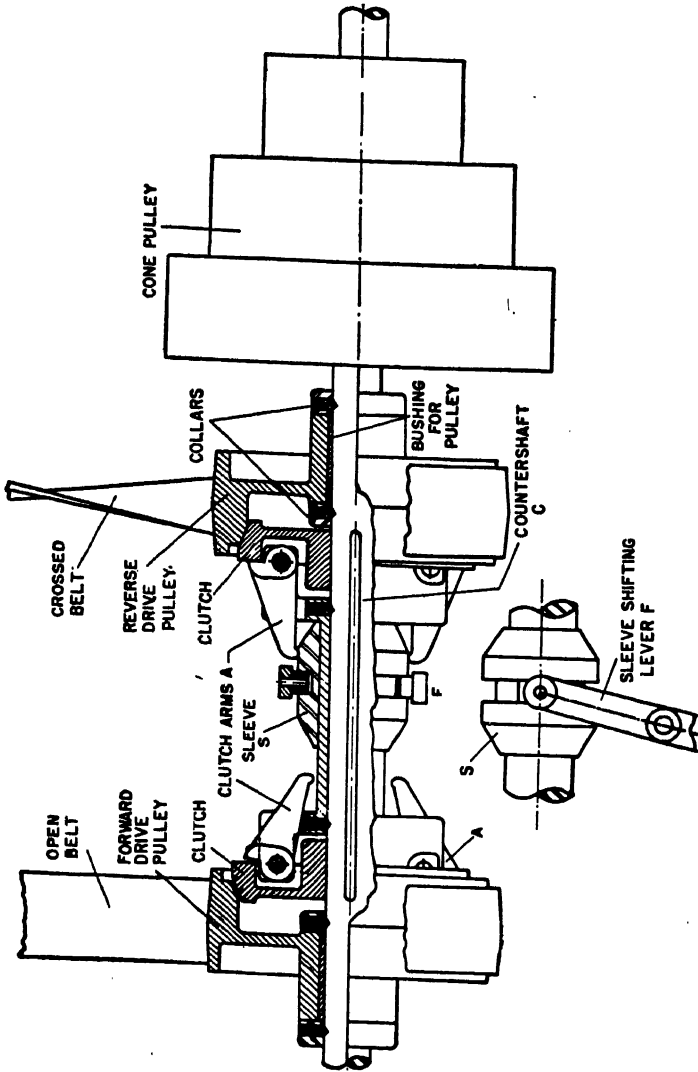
Reversing—Open and Crossed Belt—Countershaft Drive.
